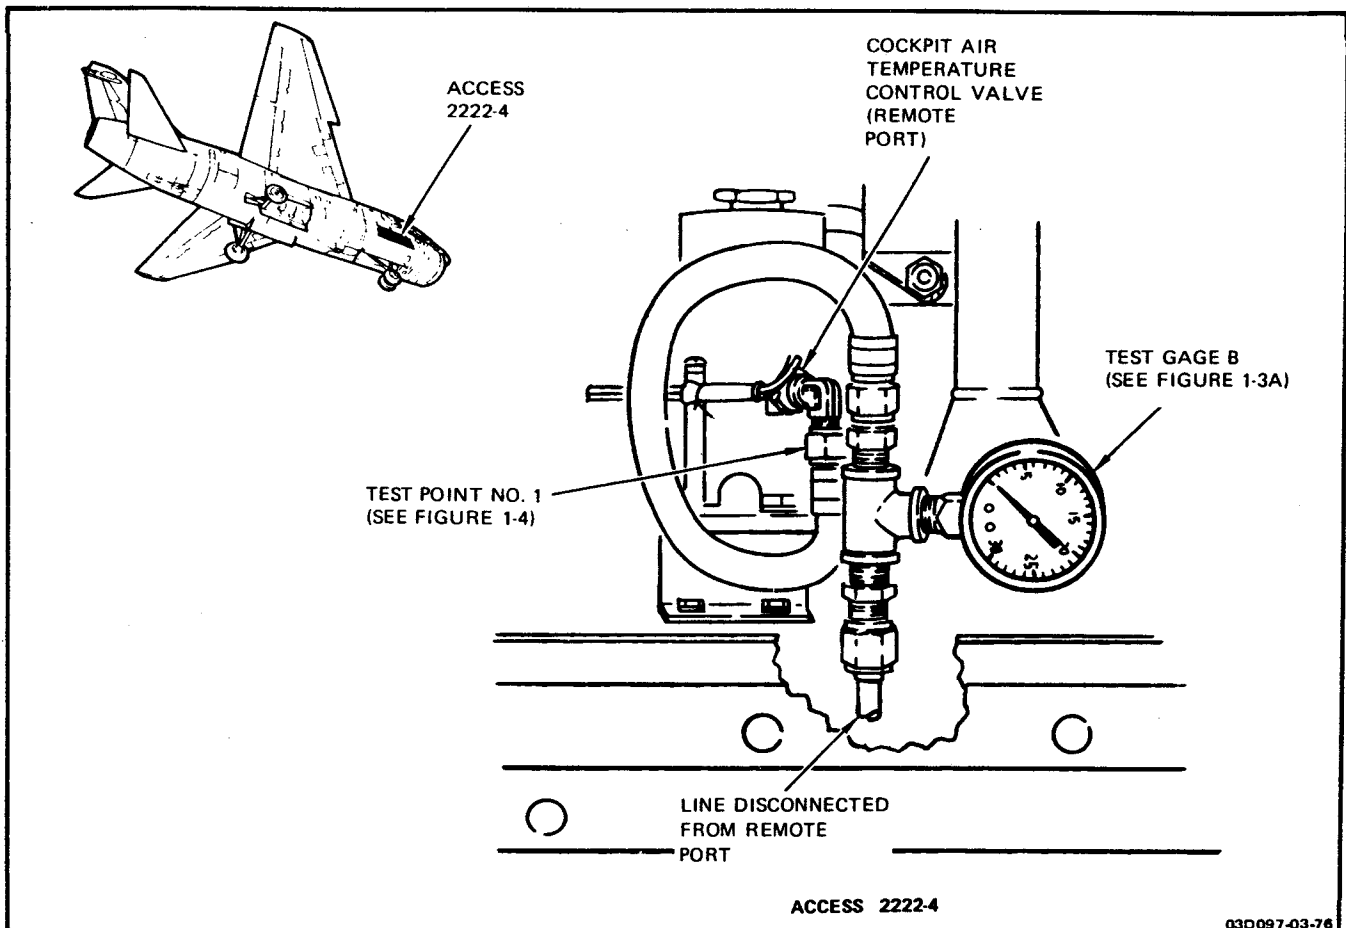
B. Cockpit Air Temperature Control Valve Pressure Gage Placement
